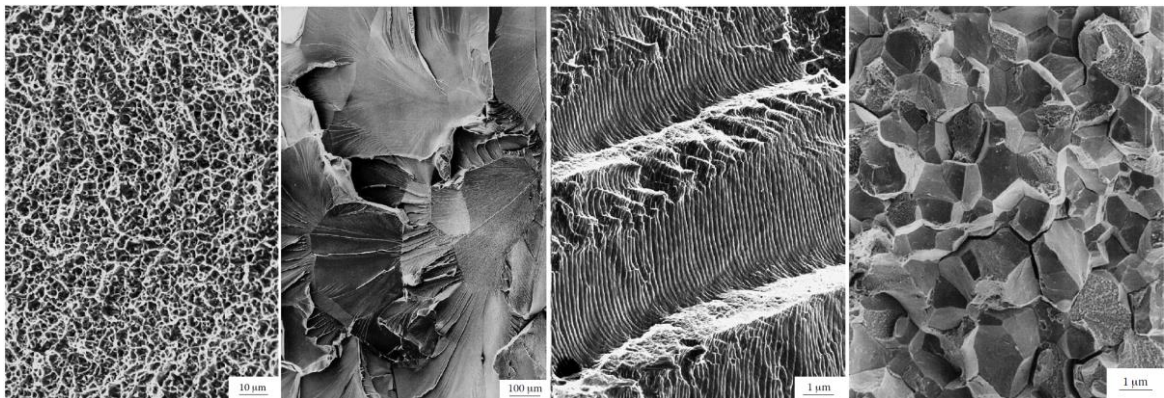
(a) Fine equiaxed dimples. (b) transcrystalline cleavage. (c) Fatigue fracture. (d) intergranular fracture.[24]
